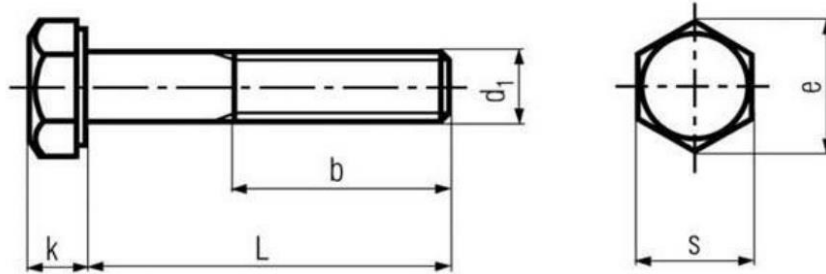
2D drawings of the hex bolt with dimensional descriptions
